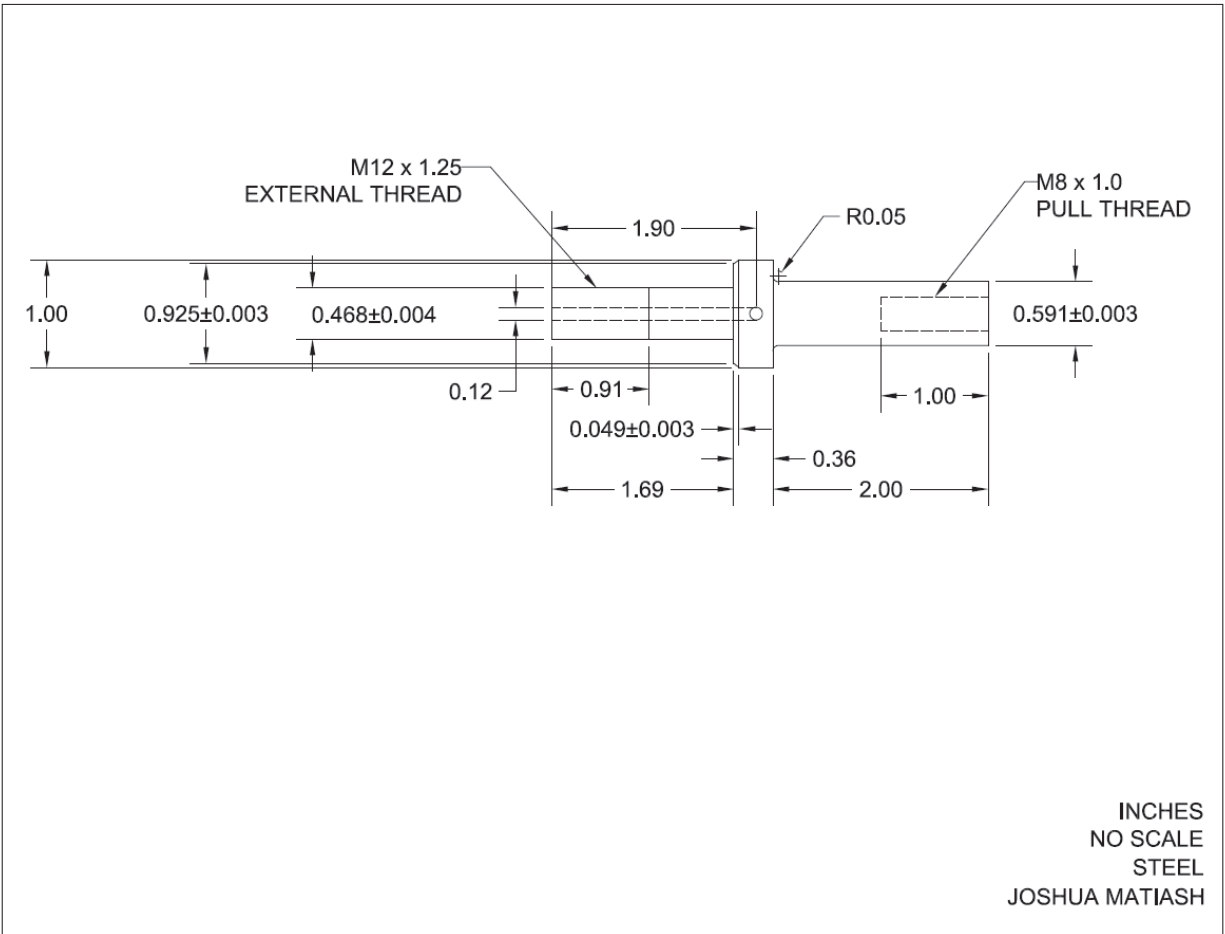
EPC 121 crankshaft encoder shaft adaptor for a Yamaha Genesis 80.
